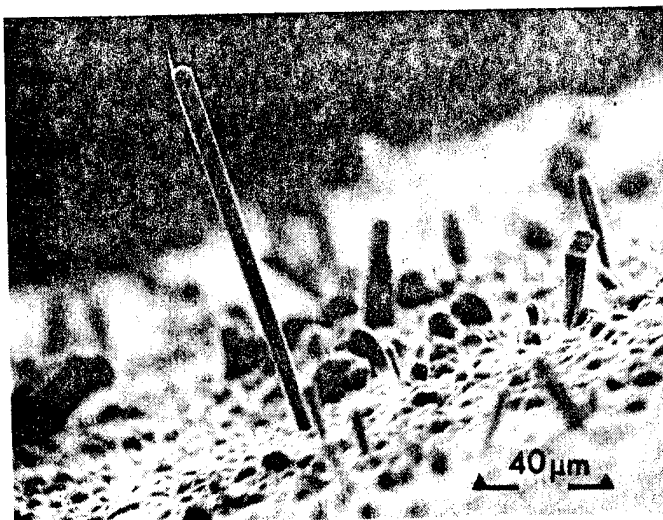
Filamentary growths of single crystals, termed "whiskers", growing on cadmium, zinc and tin-plated components. The whiskers shown here on tin-plated crimp connectors were seen to grow after their barrels had been deformed by a crimping tool. Some whiskers have been found⁽⁵⁾ to grow to lengths exceeding 2 mm and they can carry currents up to 32 mA before burning out. As spacecraft electronics progressively employ reduced spacing between conductors, any undetected whiskers which become detached during launch vibration may float under zero gravity to cause short-circuits.
